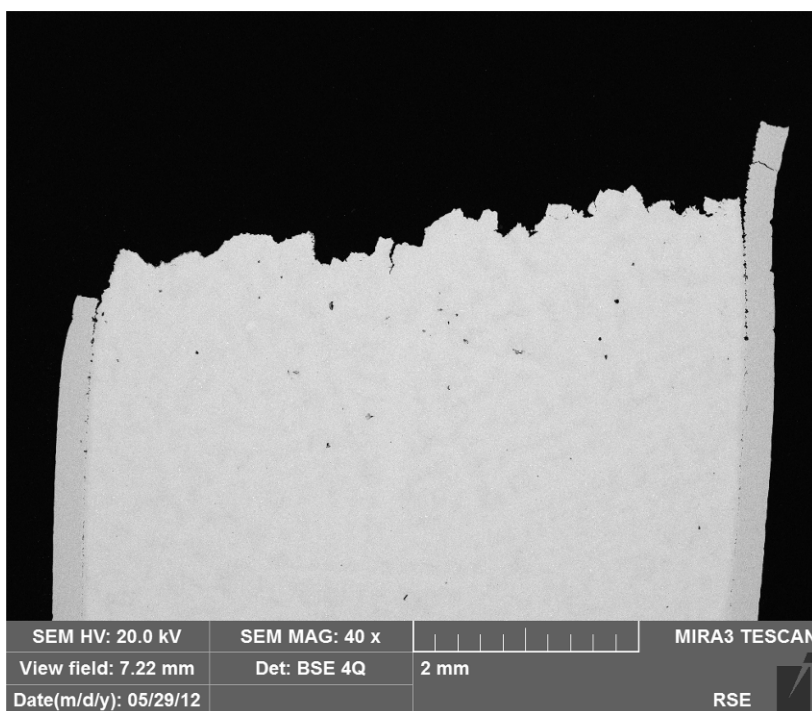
Macro view of metallographic specimen transversal to fracture surface (R262-6)
